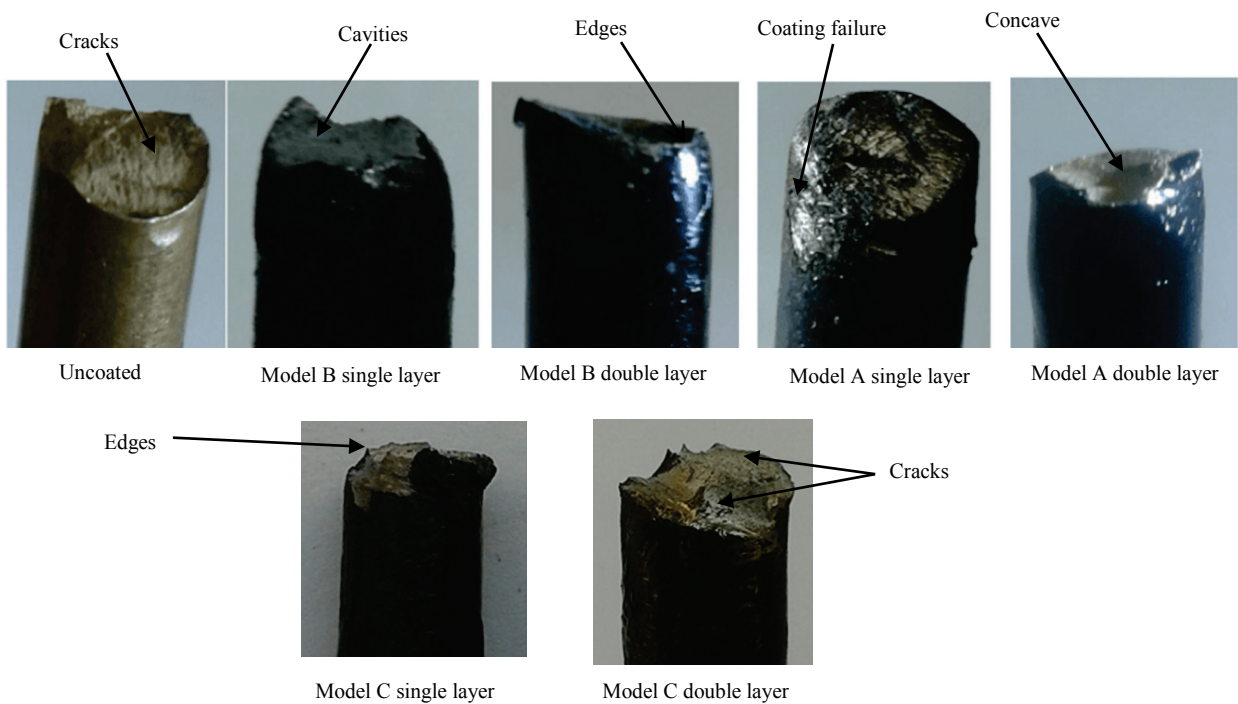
Fracture surface of specimens after test in north Rumaila crude oil.
